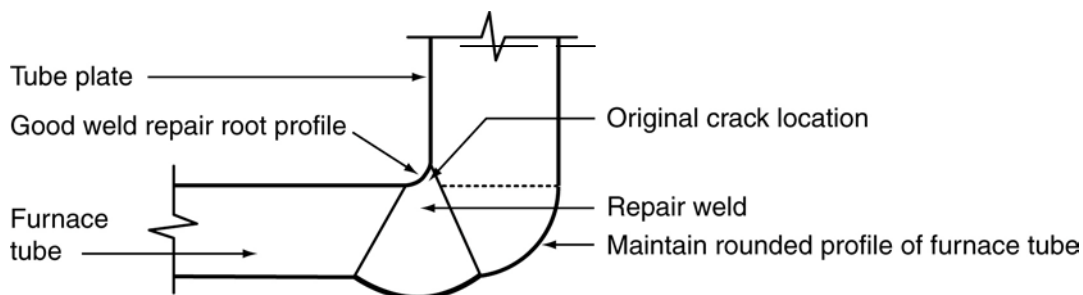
Local repair technique for furnace tube cracks located at toe of original installation weld
